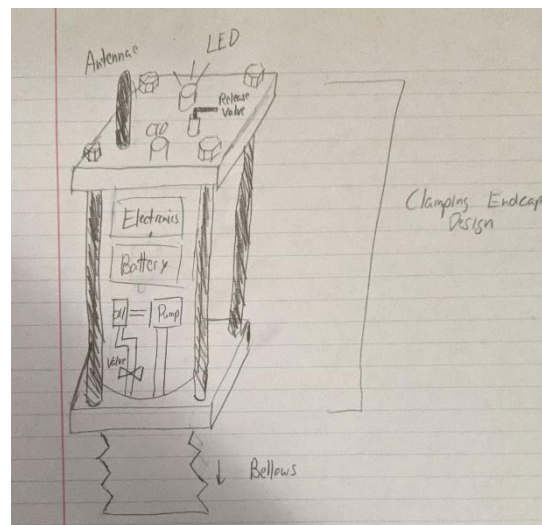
Concept sketch of a cylindrical design with an oil-driven hydraulic bellows and clamped plate endcaps.
